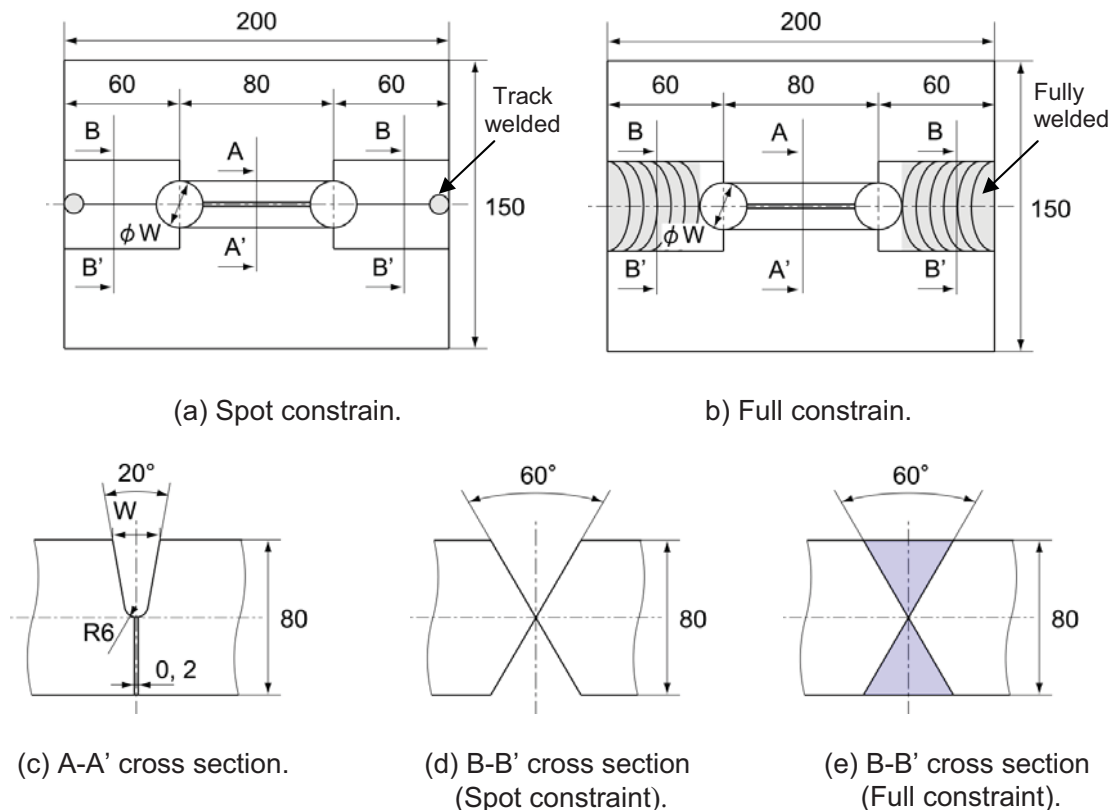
Specimen geometry of U-groove weld cracking test.
